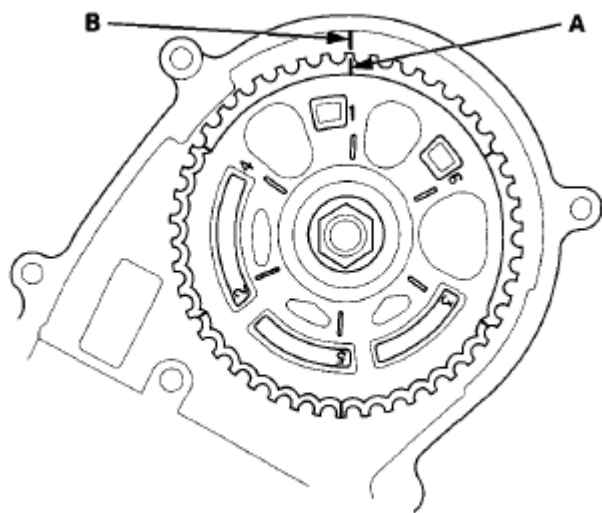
Identifying TDC Marks On Crankshaft Pulley And Pointers On Back Cover - Front
